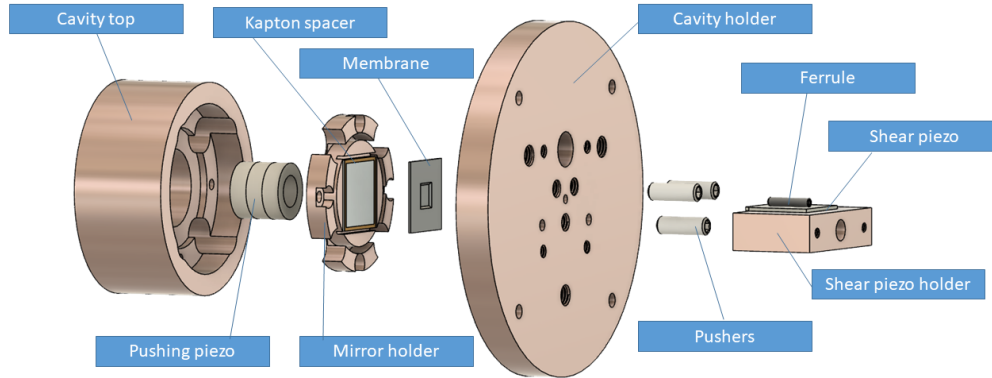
Exploded view of the fiber MATE cavity design. The "cavity top" and "mirror holder" parts are the same as before. The "cavity holder" has been modified with extra threads for the "pushers", a hole to fit the ferrule and 2 extra threads to put screws holding the "shear piezo holder". The shear piezo holder has a hole in the middle for the pusher.
